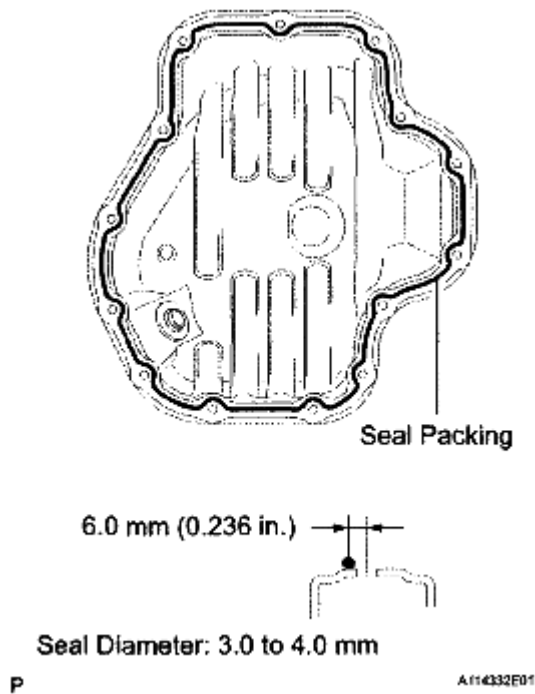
Identifying Oil Pan Sub-Assembly Seal Packing Area
